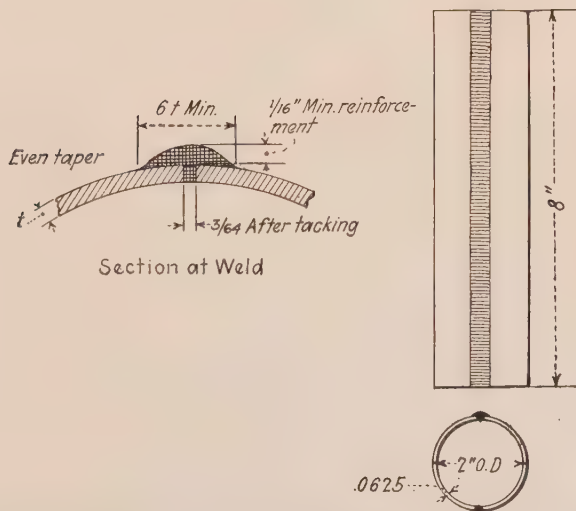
Position butt-weld test. Width of weld six times wall thickness.
